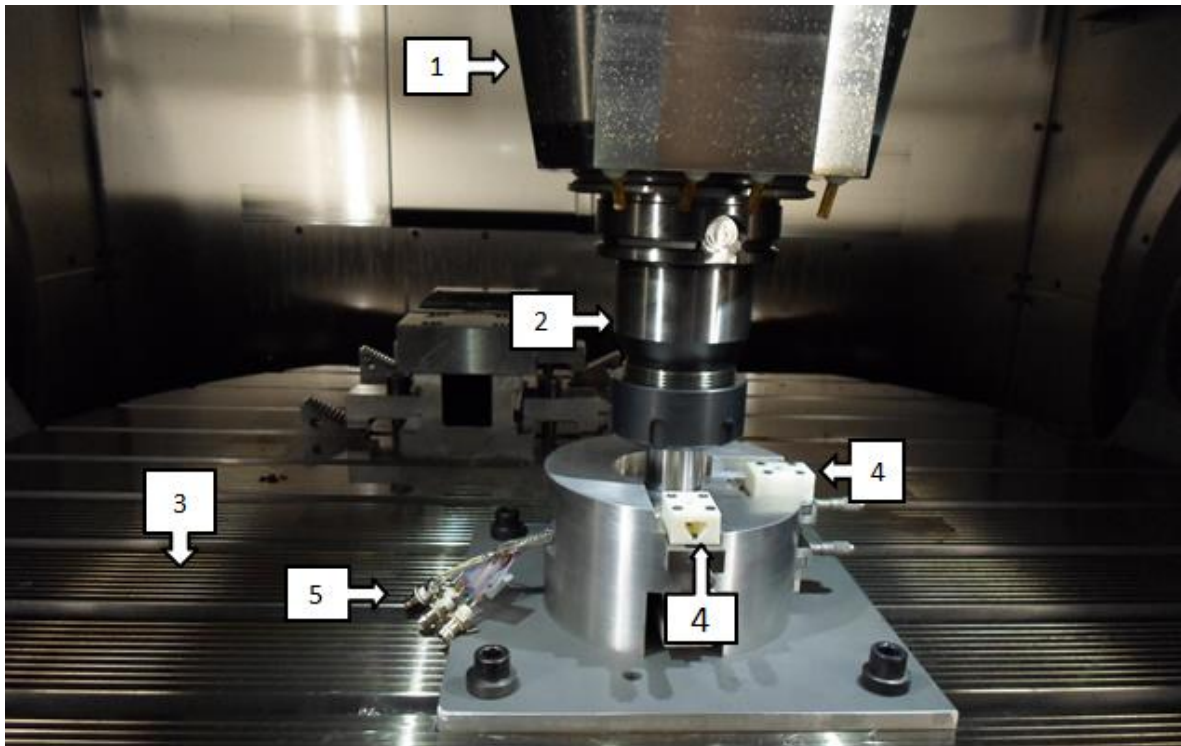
CERS unit mounted in machine tool A. (1) Spindle housing. (2) Dummy tool (3) Machine tool table. (4) Capacitive probe housing (5) Connectors for excitation unit.
